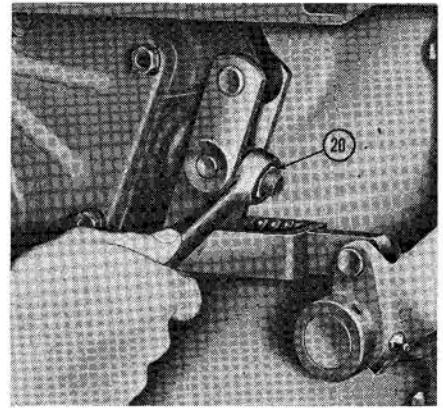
Adjusting disc brake free pedal. Refer also to Fig. 164 and to text.
